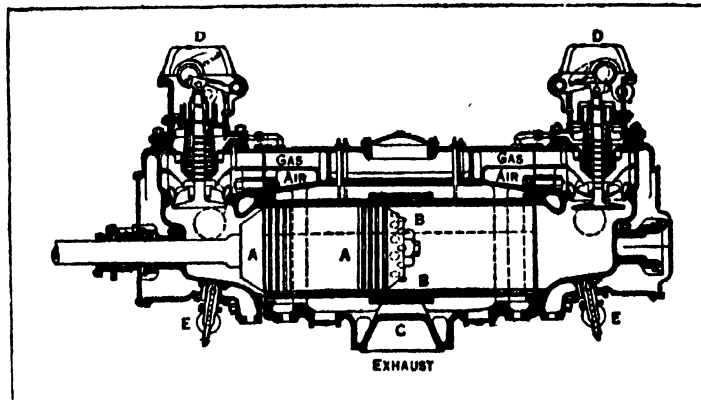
LARGE HORIZONTAL GAS ENGINE. A 2-CYLINDER, DOUBLE-ACTING, 4-STROKE, SINGLE-CRANK NUREMBERG ENGINE
